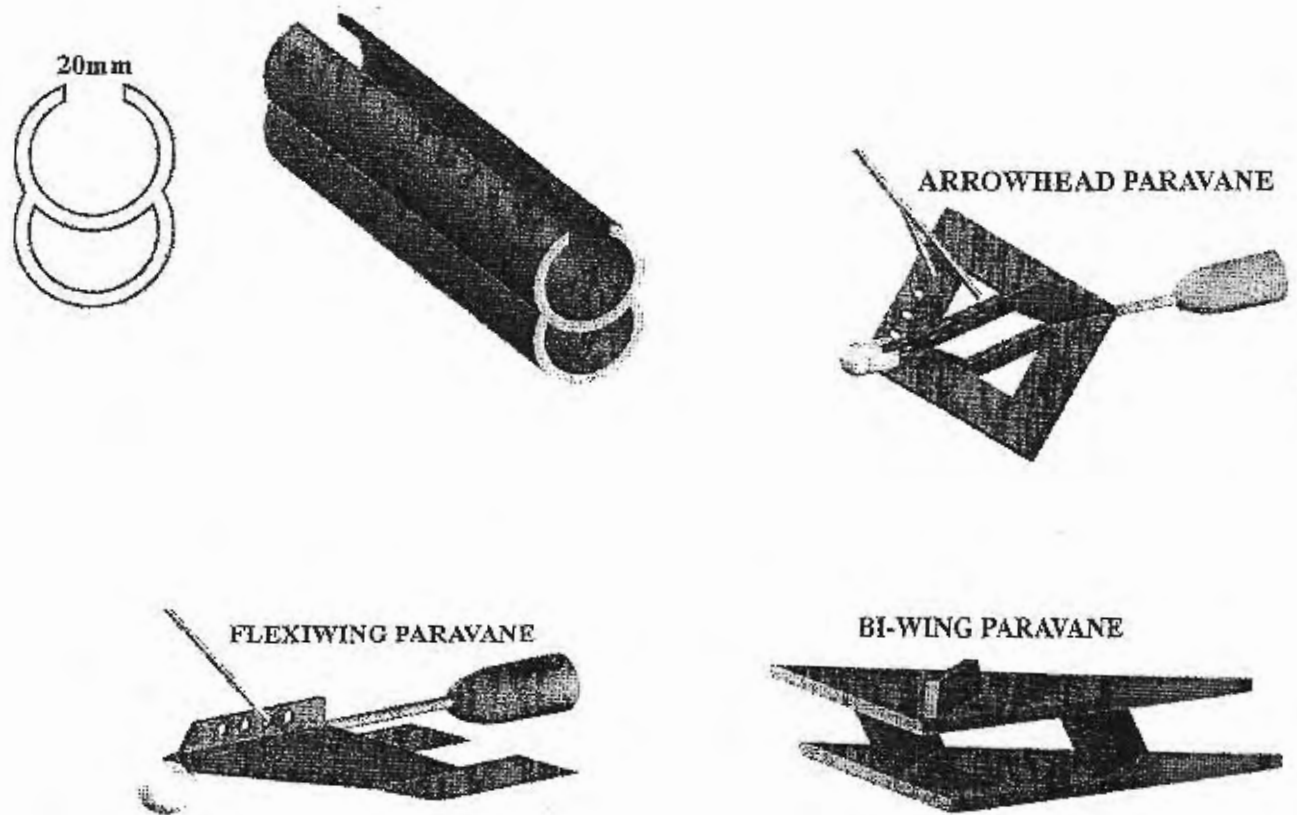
CROSS-SECTION OF SETTING TUBE TESTED ON THE FV DANIEL SOLANDER, AND PARAVANES USED: TOP RIGHT, ARROWHEAD ; BOTTOM LEFT, FLEXIWING; BOTTOM RIGHT, BI-WING.
